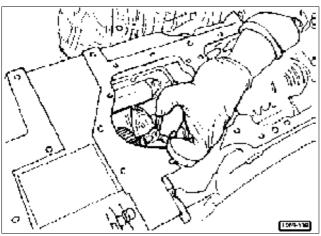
Locate the stop circlip on the input shaft of the P.T.O. clutch assembly.
